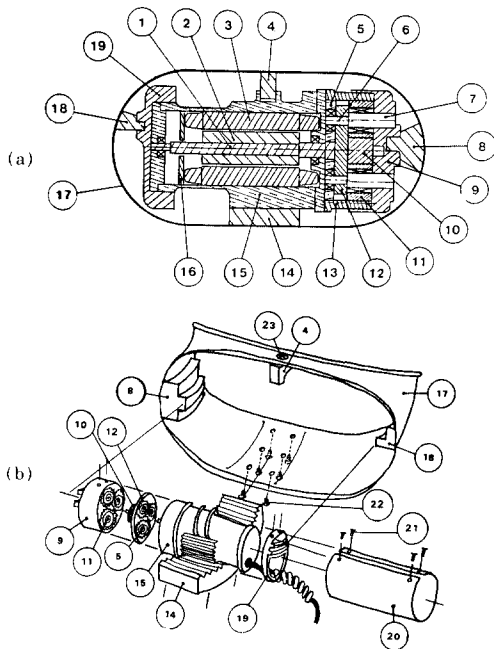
(a) Structural sketch of the actuator, and (b) Perspective view of the actuator assembly.
